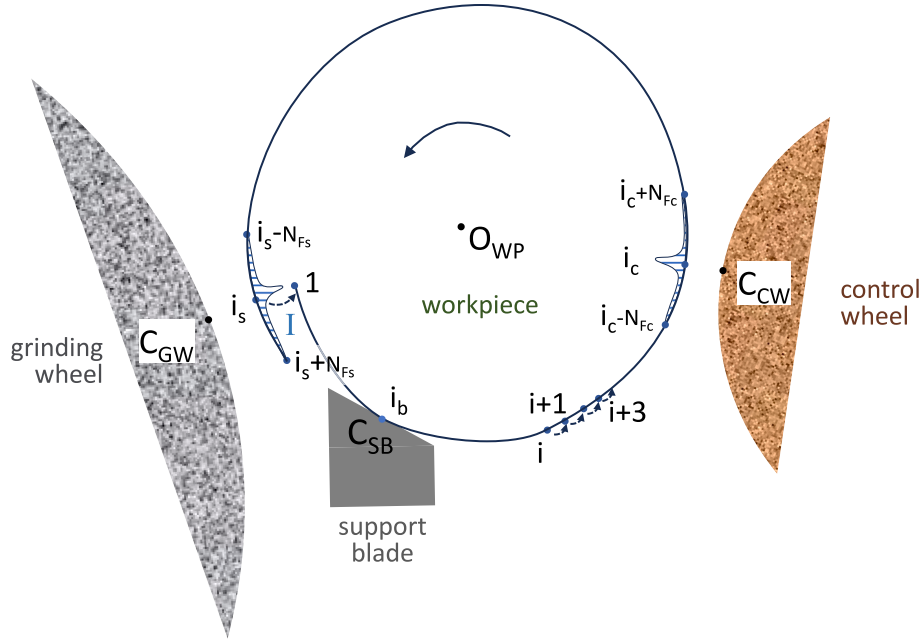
Workpiece profile vector definition with the significant indices at the contact points between the workpiece and the grinding wheel (GW), the control wheel (CW) and the support blade (SB).
